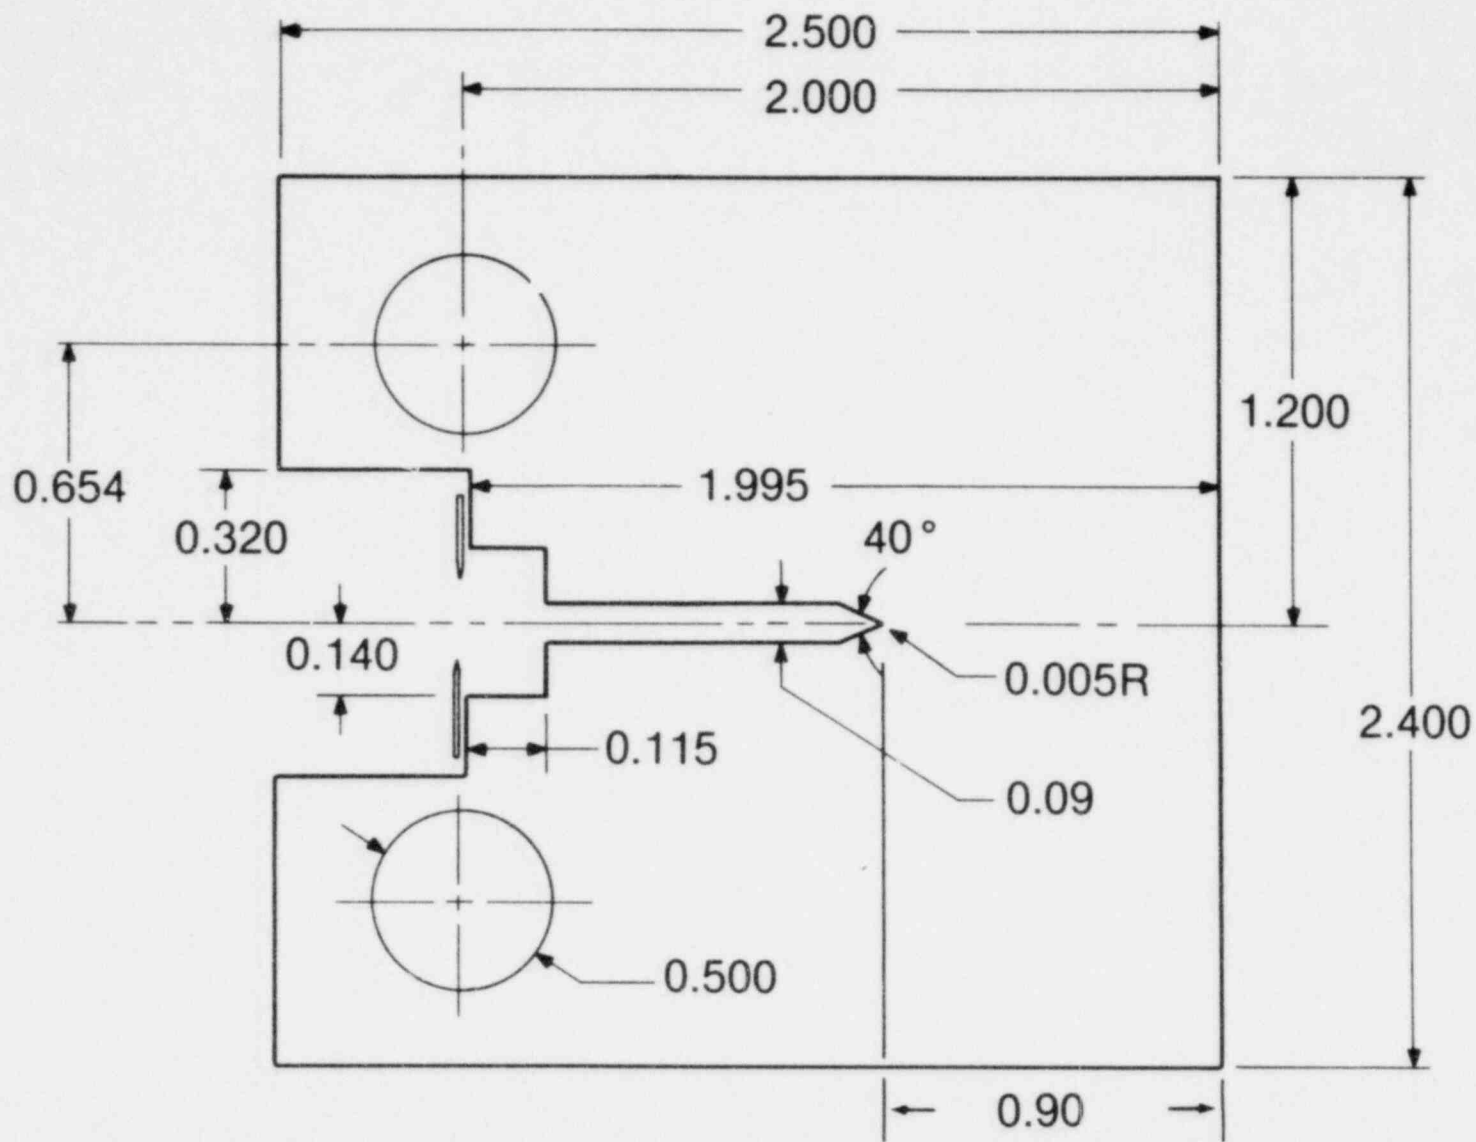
IT compact specimen geometry for an a/W of 0.6. A precrack of 2.5 mm (0.100 in.) is added prior to testing. All dimensions are in inches (in. \times 25.4 = mm).
